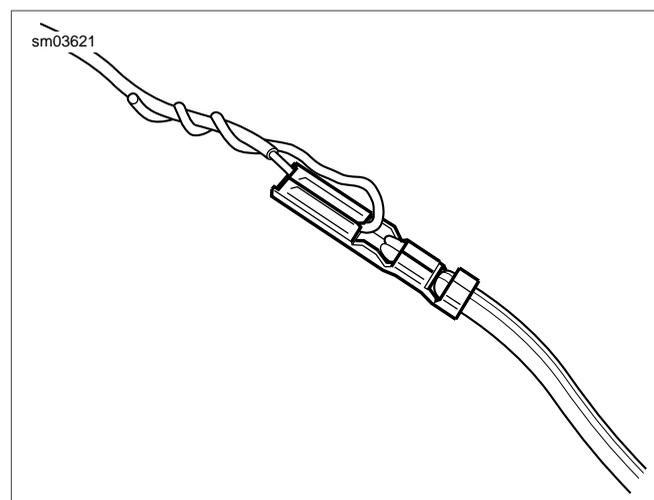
Fix Mechanics Wire to Socket Terminal
